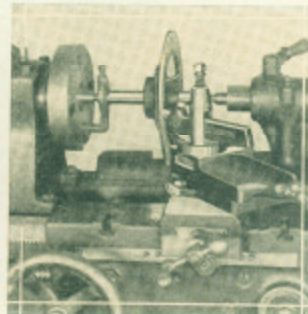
Truing a Clutch Disc Mounted on an Arbor
